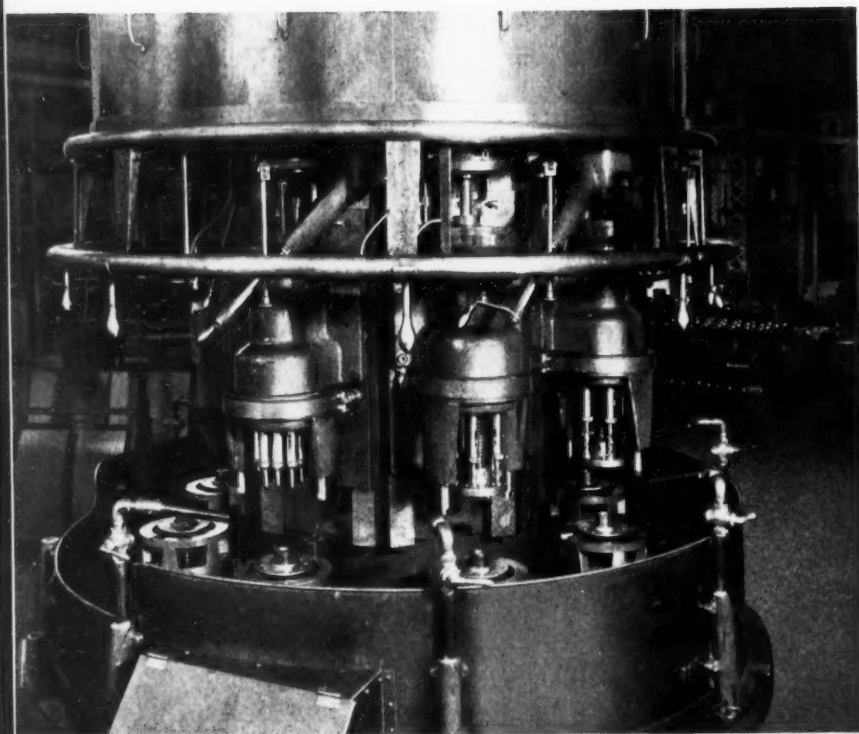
Finish-milling the Top Faces of Cylinder Blocks on Re-built and Rearranged Machine
